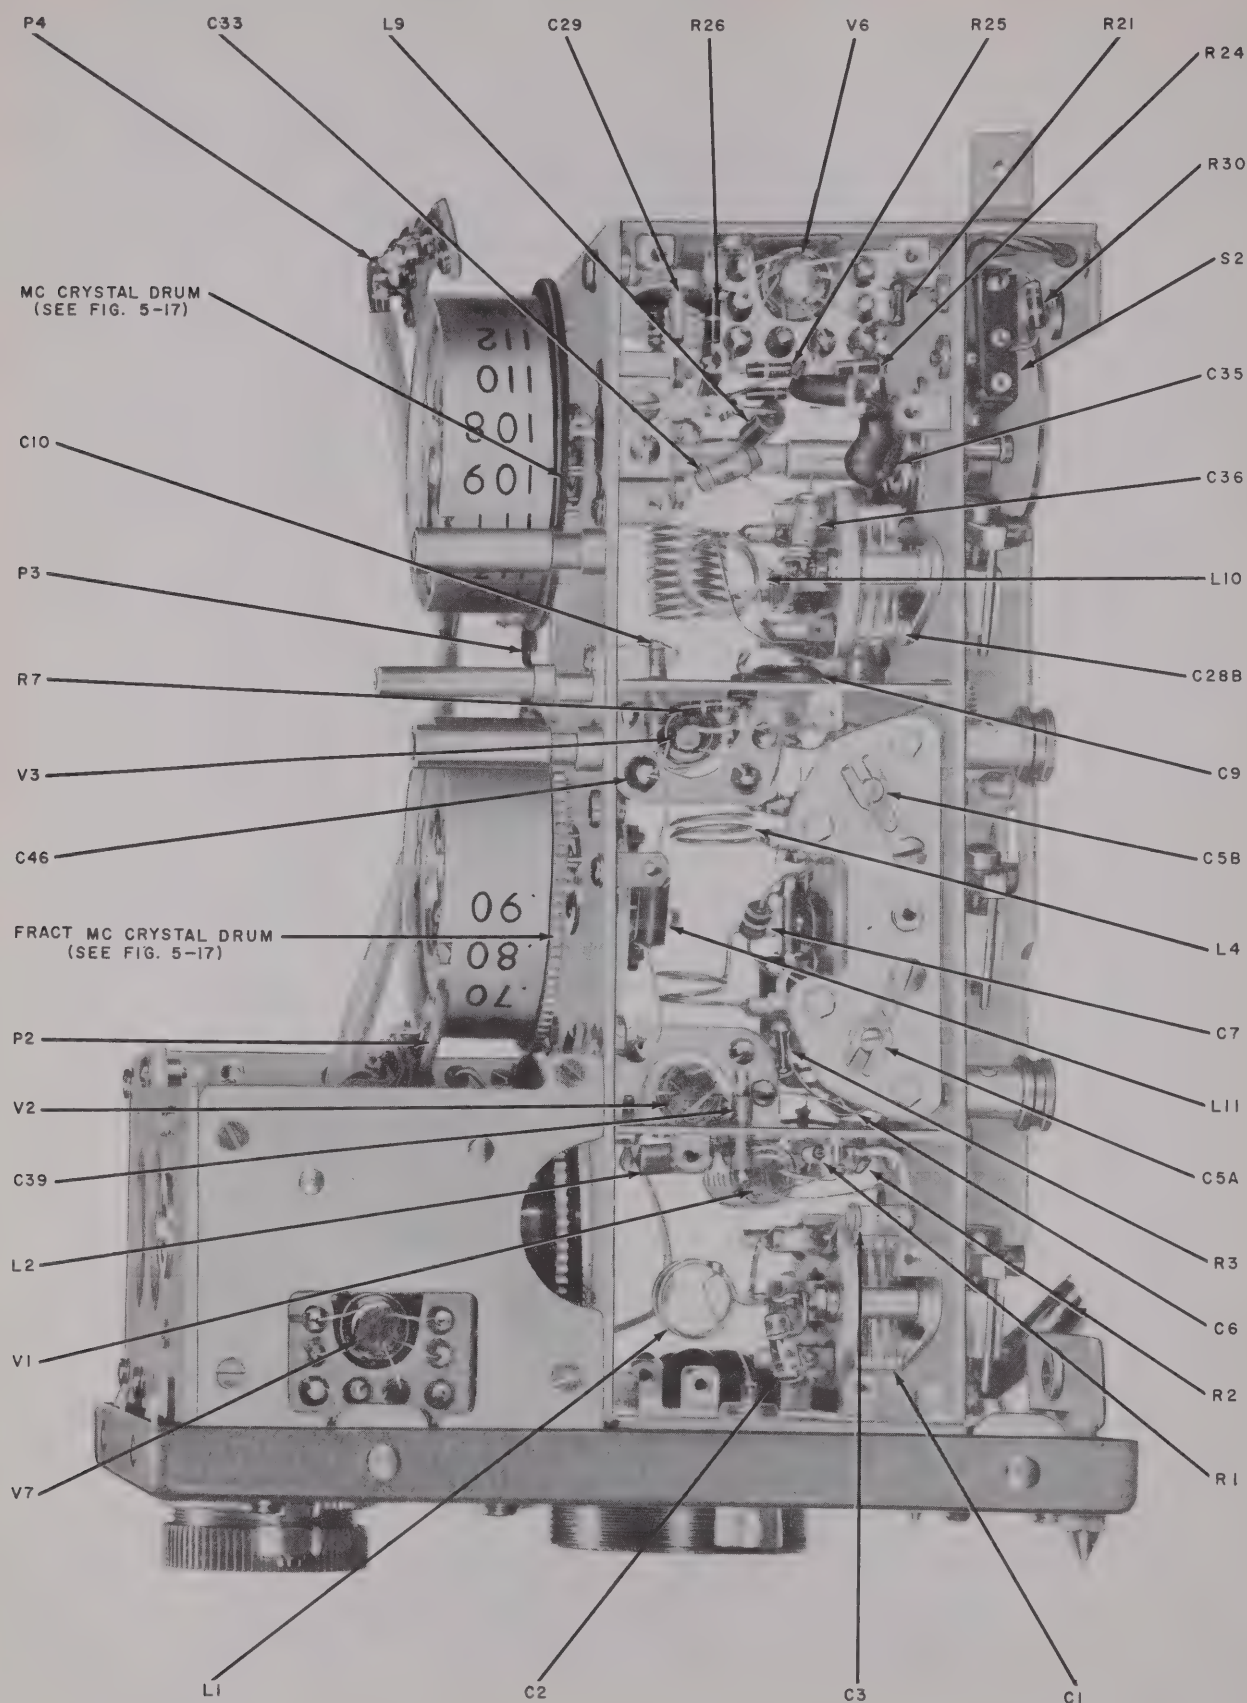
R-34A Receiver, R-f/I-f Assembly, Right Side View
